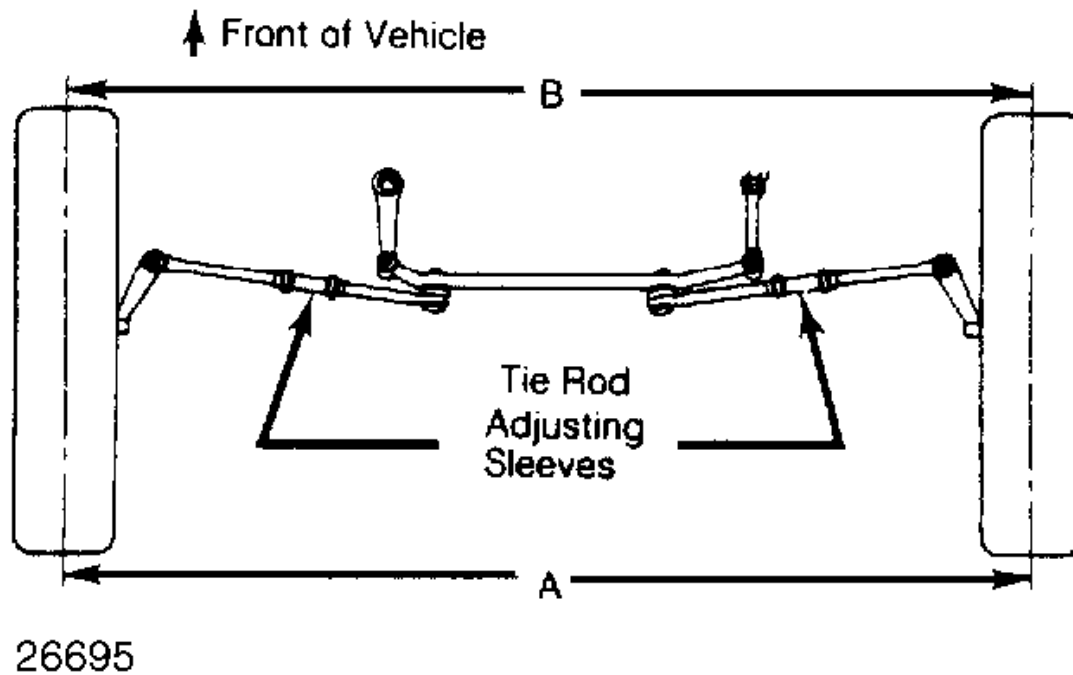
Adjusting Tie Rod Sleeves (Top View)
